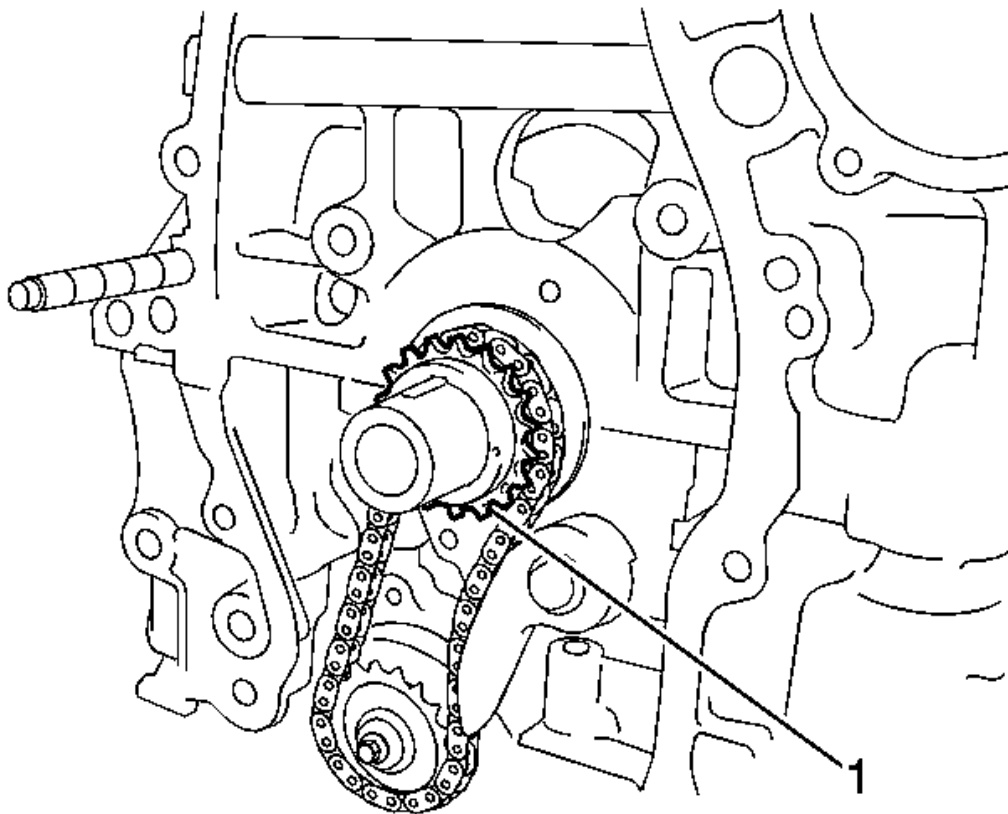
View Of Crankshaft Timing Gear/Sprocket
